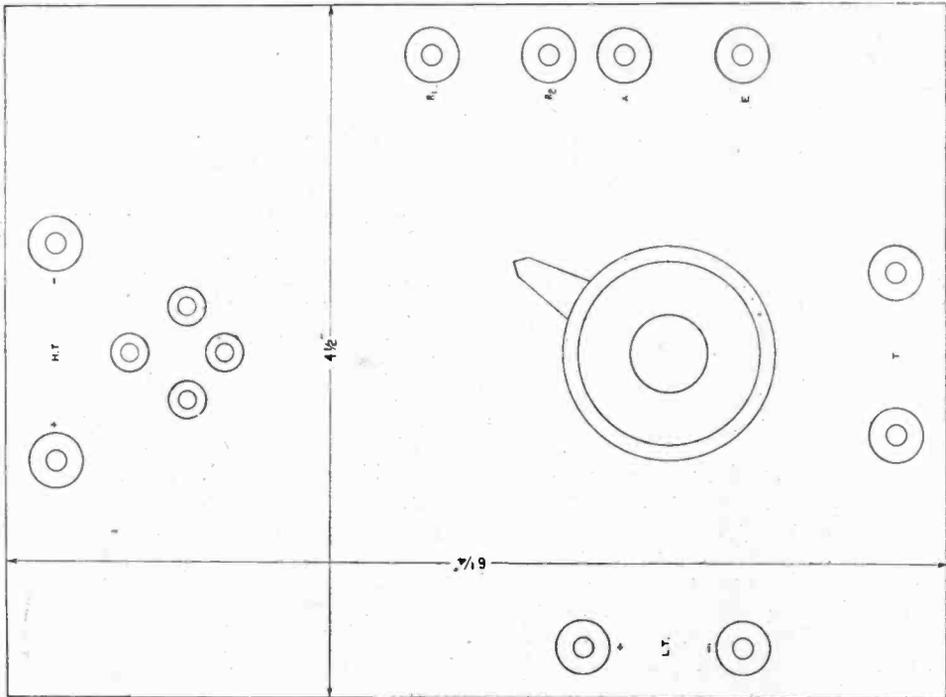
Scale drawing of the top of the panel, showing lay-out of terminals and valve holder. The actual size is $6\frac{1}{4}'' \times 4\frac{3}{4}''$.
